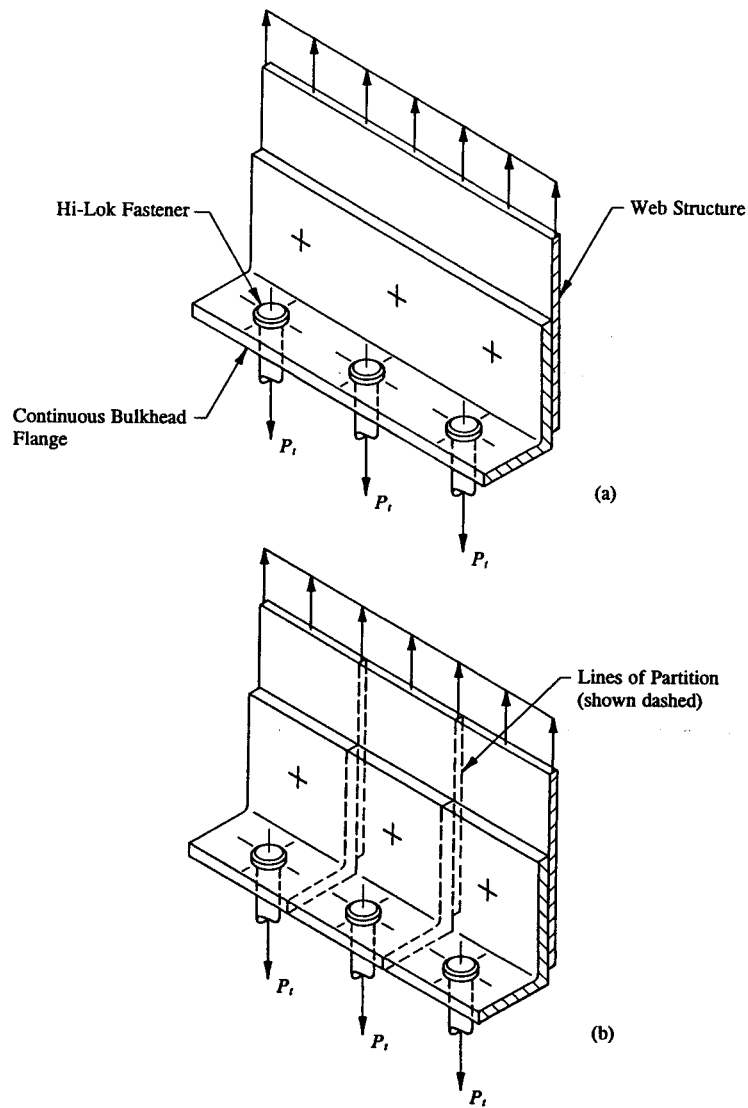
(a) Continuous bulkhead flange in tension. (b) Bulkhead flange is partitioned into individual tension clip supports.
